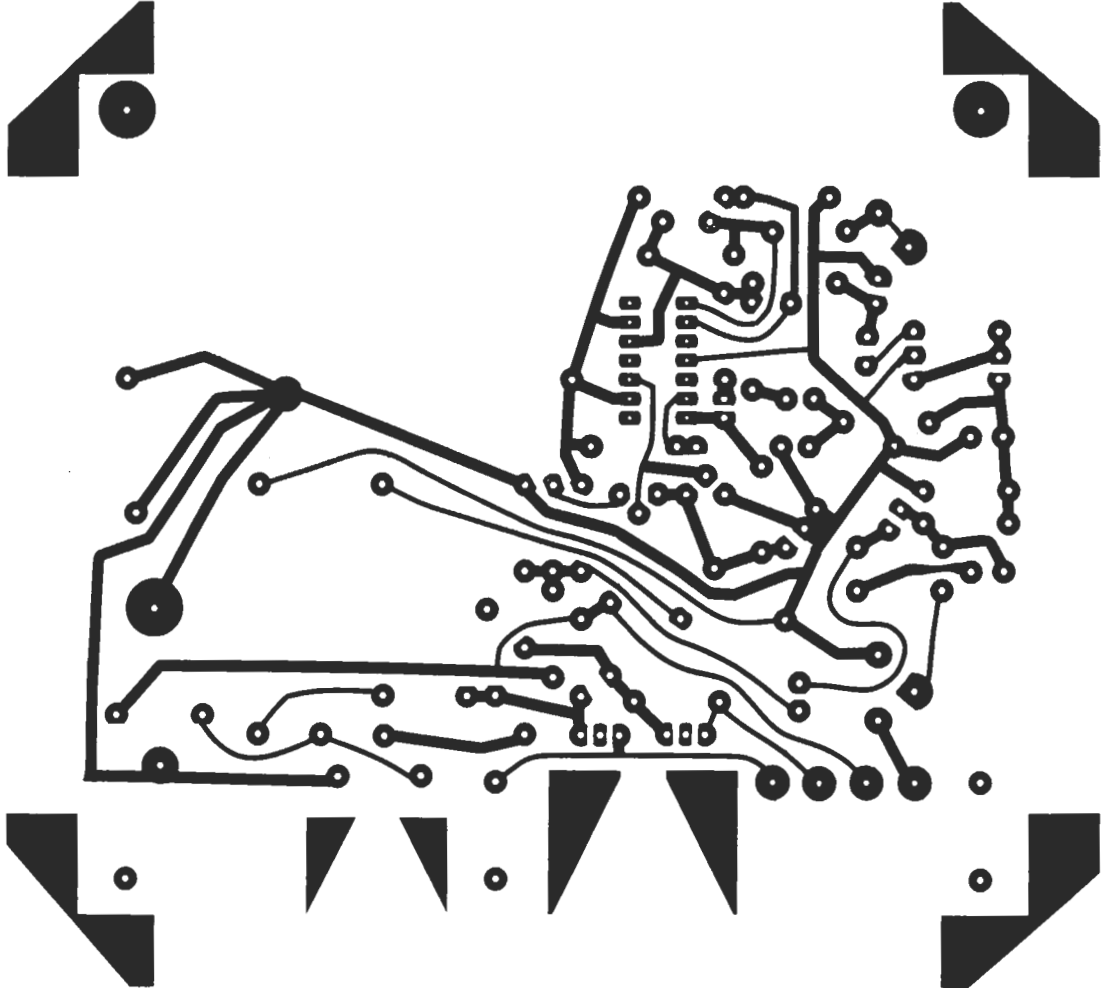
Etching and drilling guide and component layout for pc board. D10, D11, Q3, and Q4 touch heat sink.
